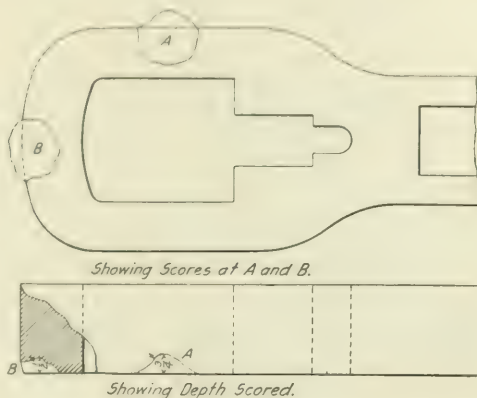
Scored Connecting Rod Repaired by Oxy-Acetylene Welding.
